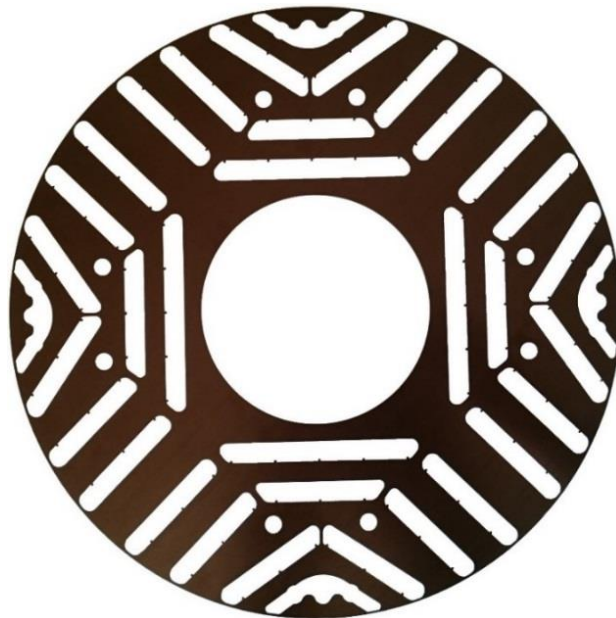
PMaSynRM prototype rotor's electric steel sheet manufactured by laser cutting.
